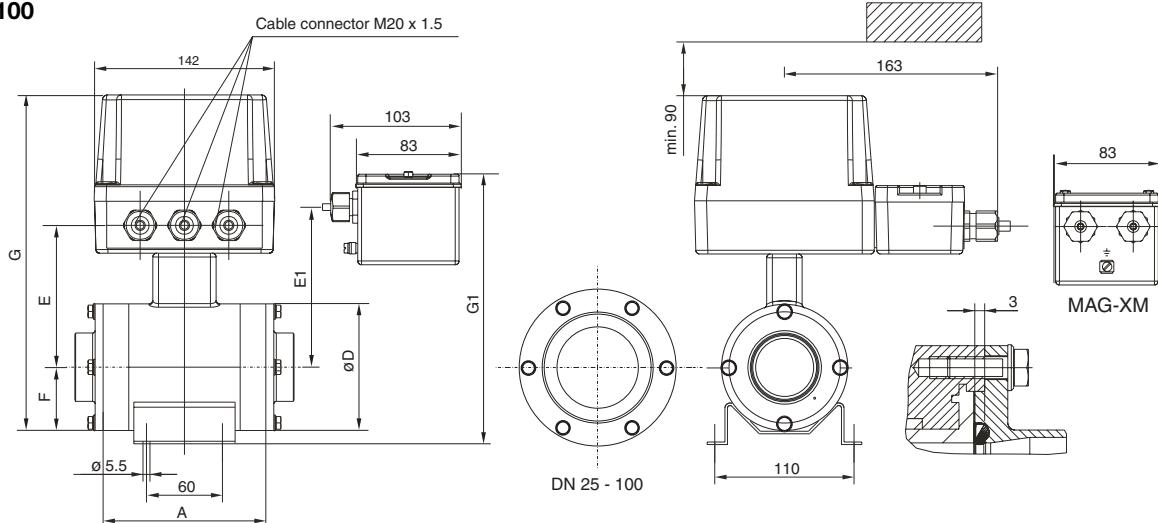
Dimension Drawings, Models DM21W and DM23W, DN 3 to DN 100 [1/10" to 4"], Wafer Design
